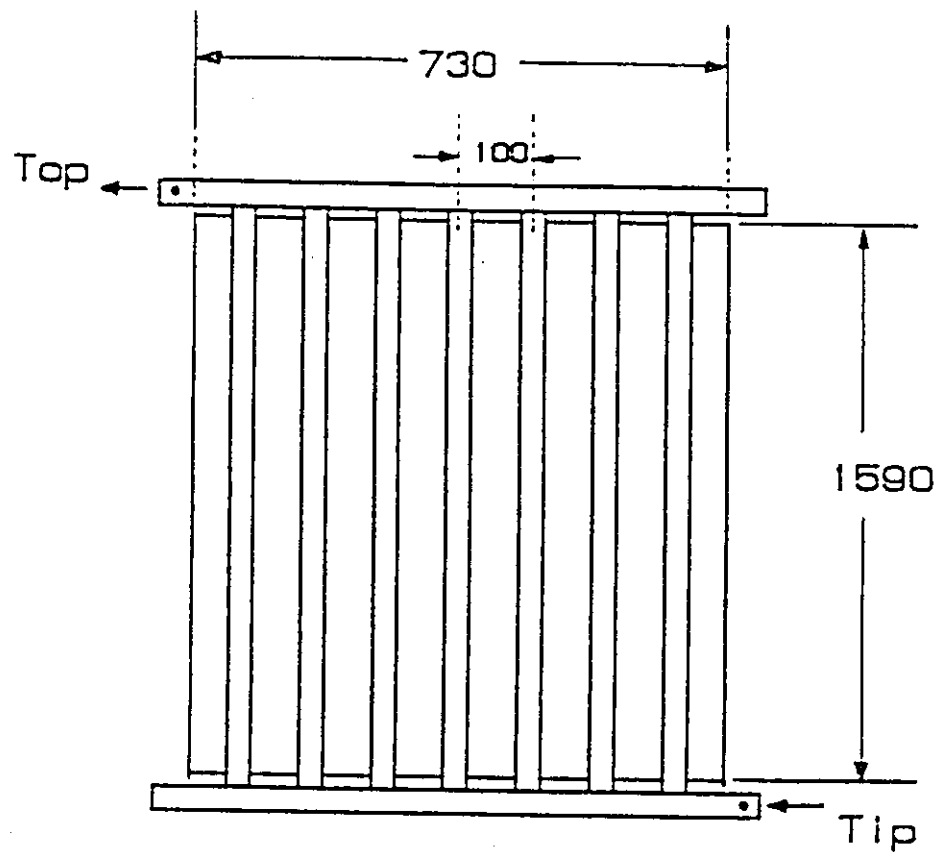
Absorber plate-tubes configuration and thermocouple wires location for the parallel tubes flat plate solar collector. All dimensions in mm.
